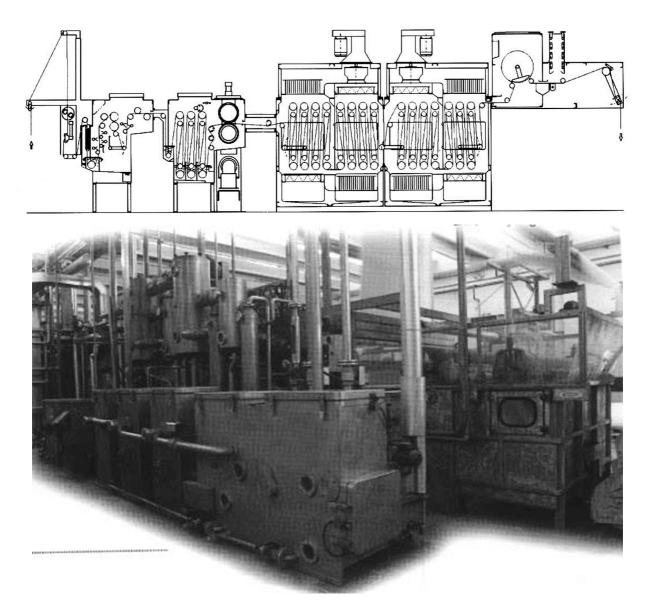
Traditional carbonising process for fabrics 1) wetting vessel; 2) squeezing unit; 3) drying unit; 4) carbonising unit.
